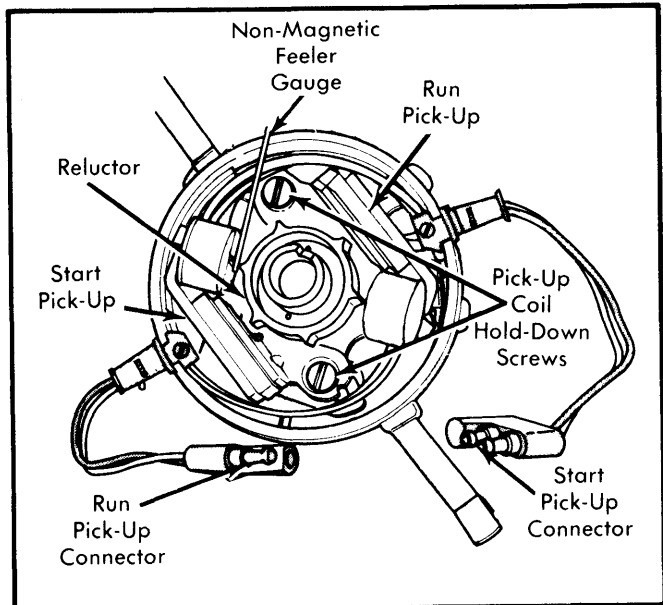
Checking Distributor Pick-Up Coil Air Gap
